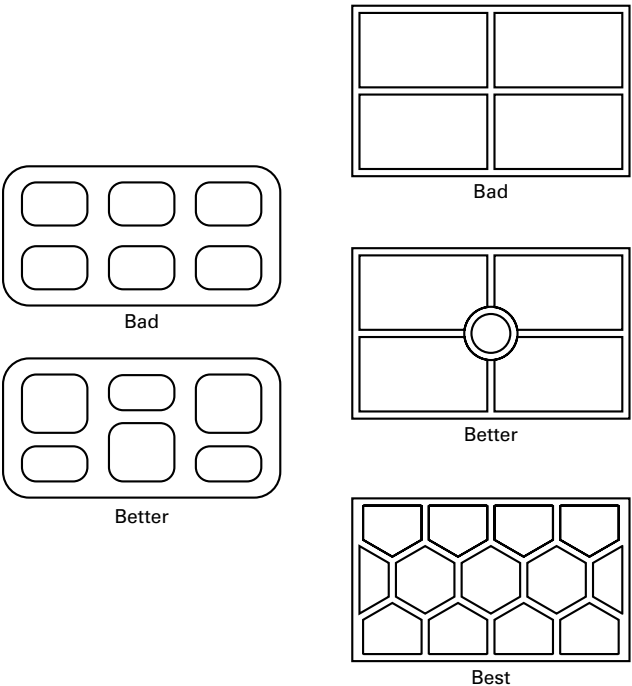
Design modifications to reduce cracking and hot spot shrinkage in ribbed castings.
